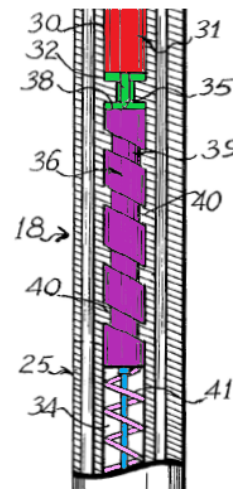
Schematic representation of the screw mechanism, Relevant components: 25 = Housing, 31 = Piston actuator, 36 = Drive shaft, 39 = Helical groove, 40 = Inward protrusion formed in housing, 41 = Compression spring. Adapted from: [60].
